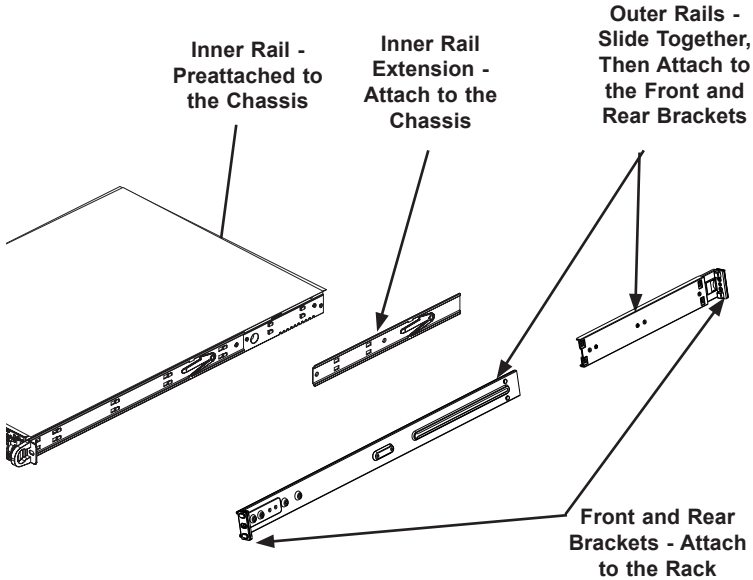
Identifying the Sections of the Inner and Outer Rack Rails (right side rack rail shown)
